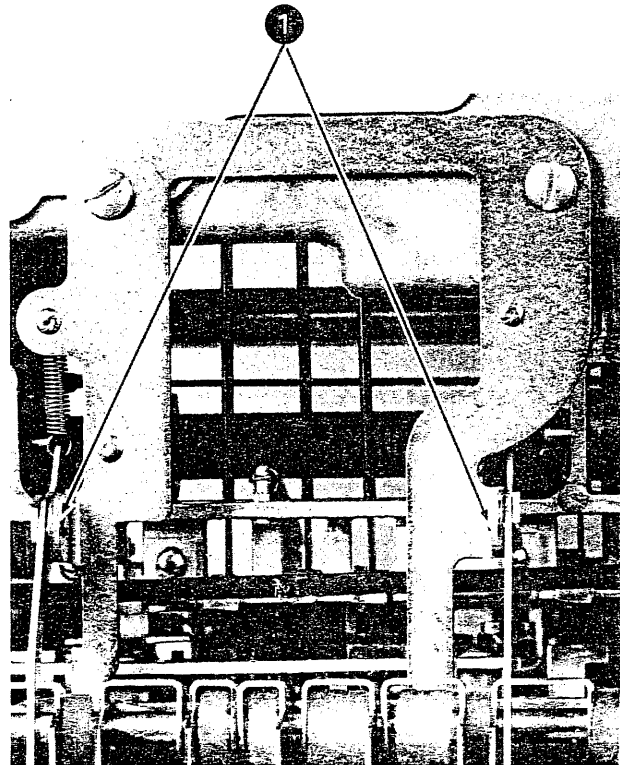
Cycle-Clutch and Cycle-Shaft Removal (Step 8)
